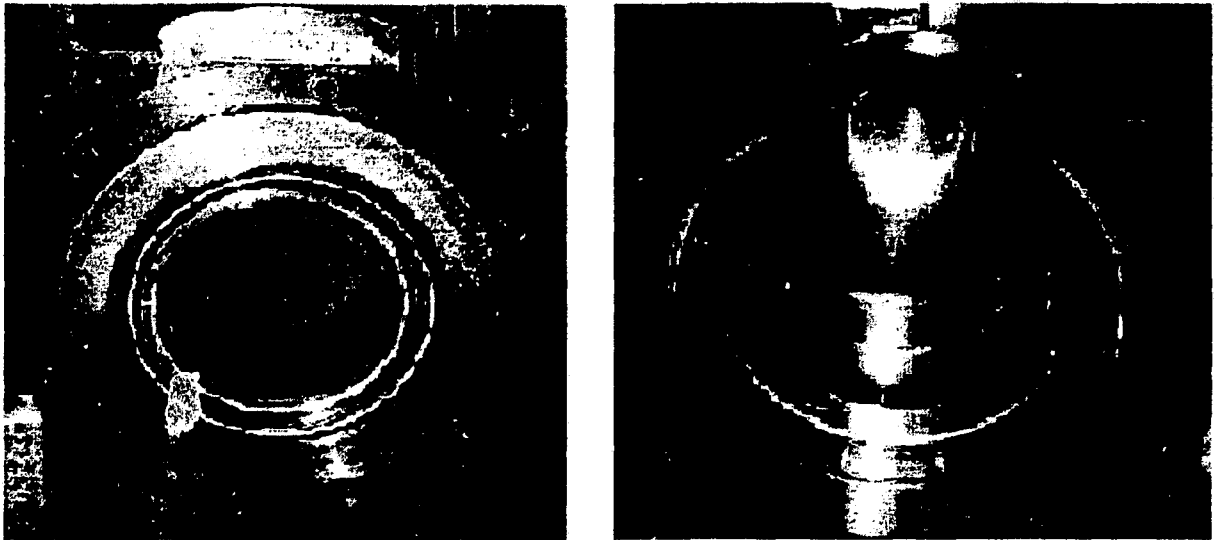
Draw bead and hemispherical punch used in laboratory experiments.
